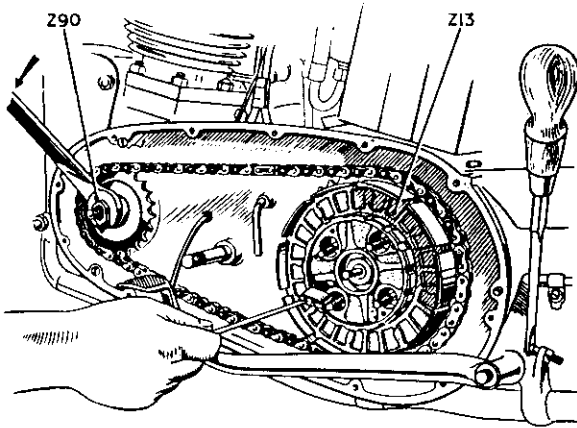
To replace Clutch Shock Absorber Rubbers on the Machine.
